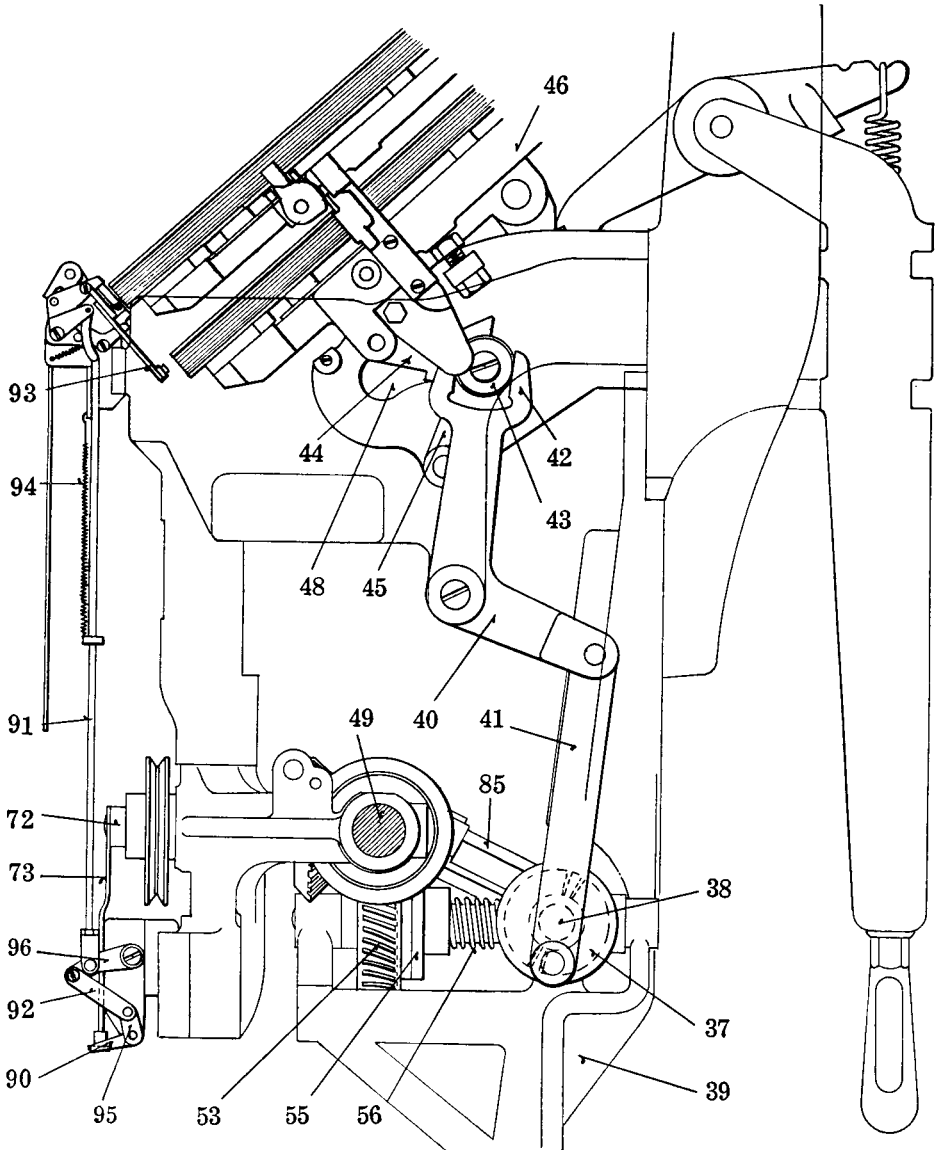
This view is similar to Fig. 12-24, but shows the upper magazine lowered to operating position by the power magazine lift mechanism.
